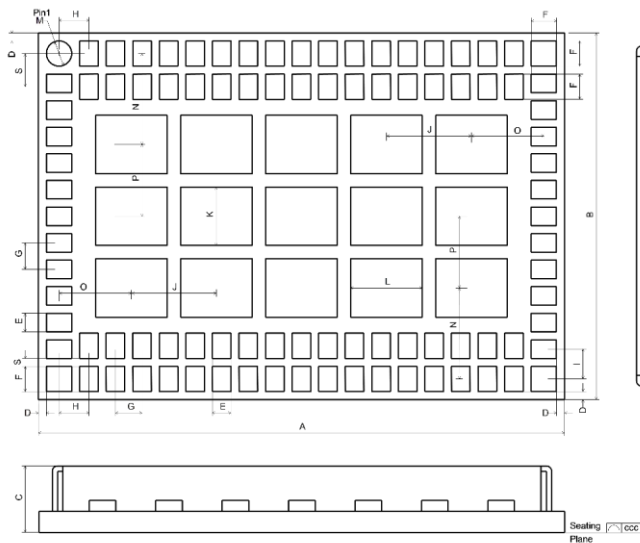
Recommended footprint for JODY-W3 module, bottom view
